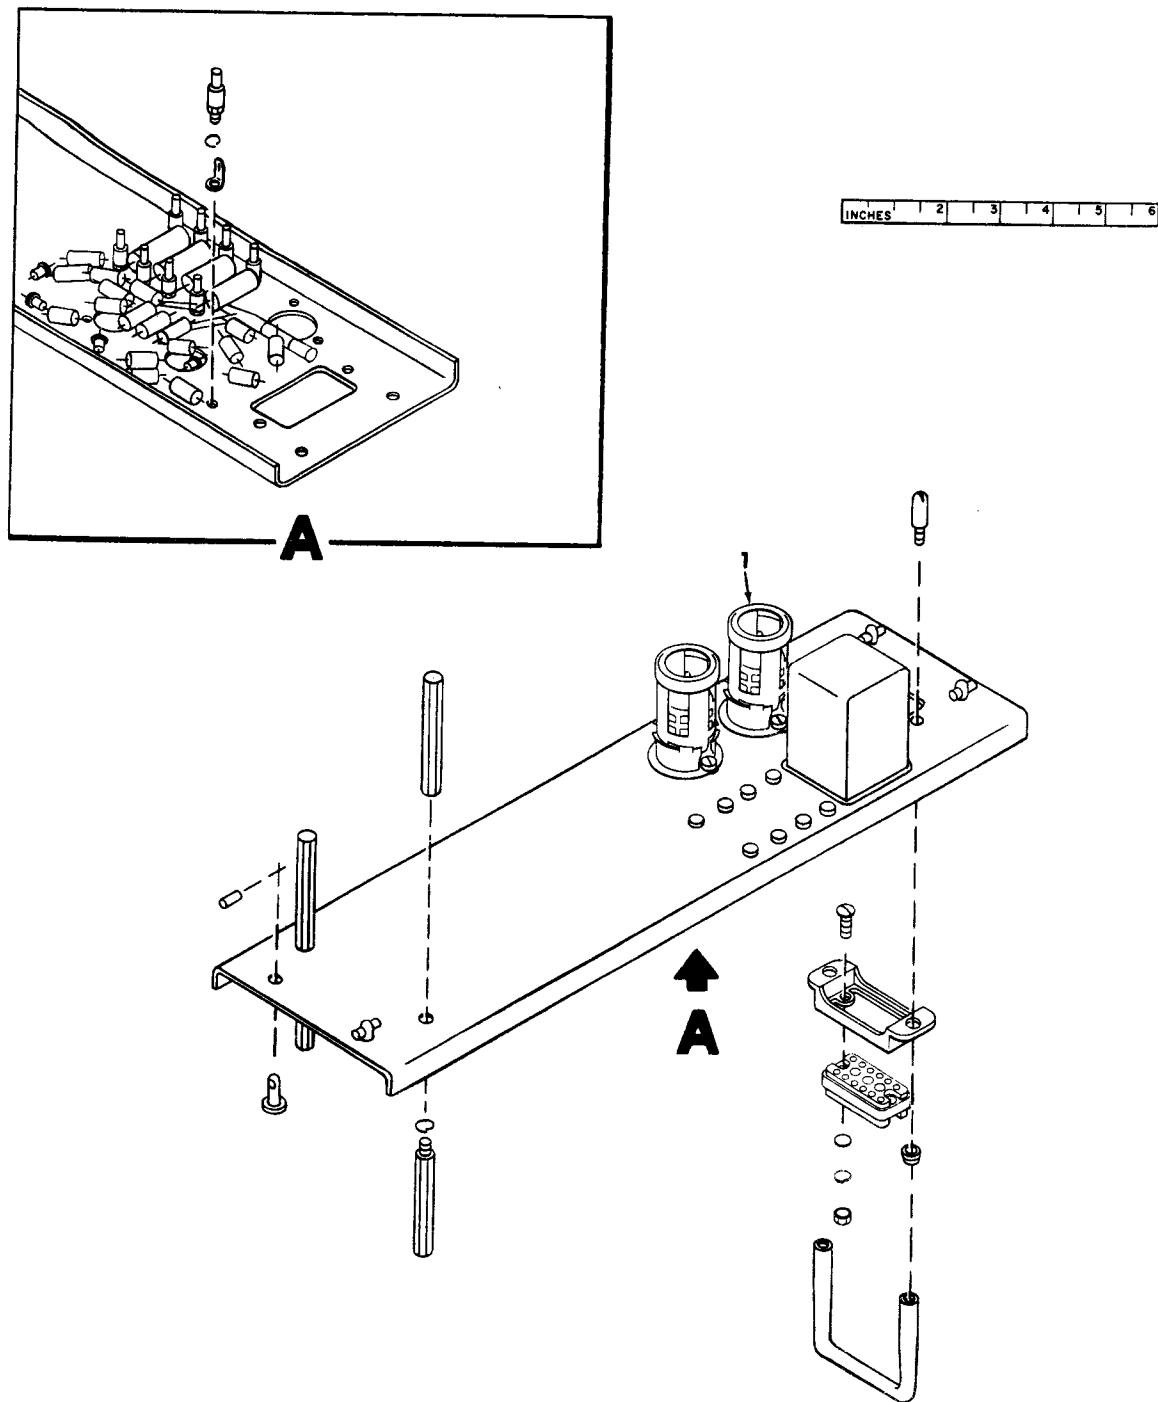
Amplifier-mixer stage (8513525)—partial exploded view
